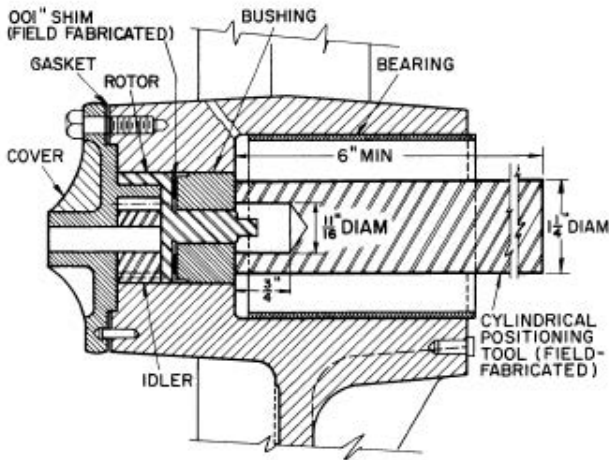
Setting Oil Pump Bushing (Typical 5F20 through 60, and 5H40 through 86 - 5F40 Bearing Head Shown)
